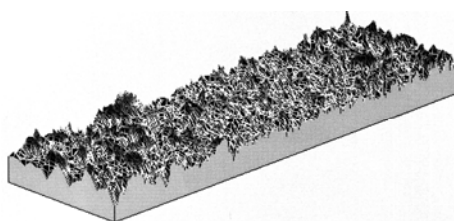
View of the 3D surface image of the iron-copper detail after infiltration.
